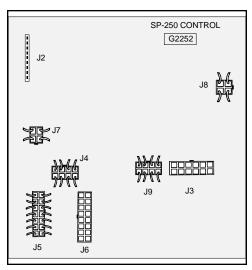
A - Remove Plugs J3 and J6 to Perform Static SCR Rectifier Assembly Test.
